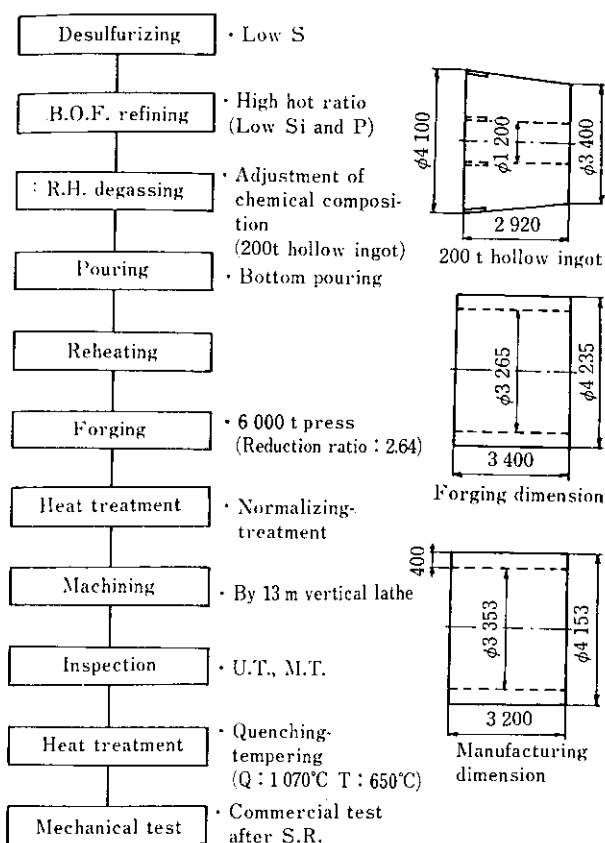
Manufacturing process and its condition of heavy section shell ring
